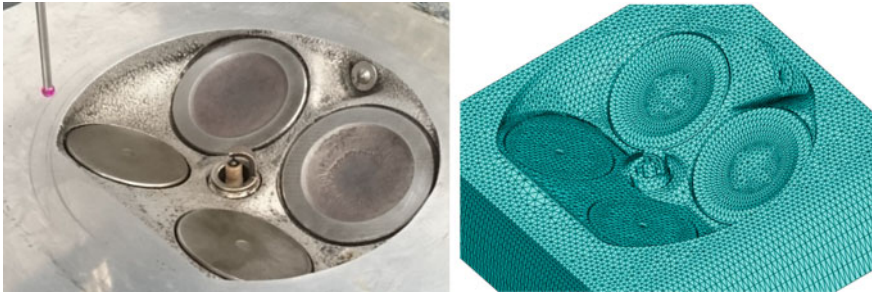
The resulted piston head *left*, cylinder head *right
